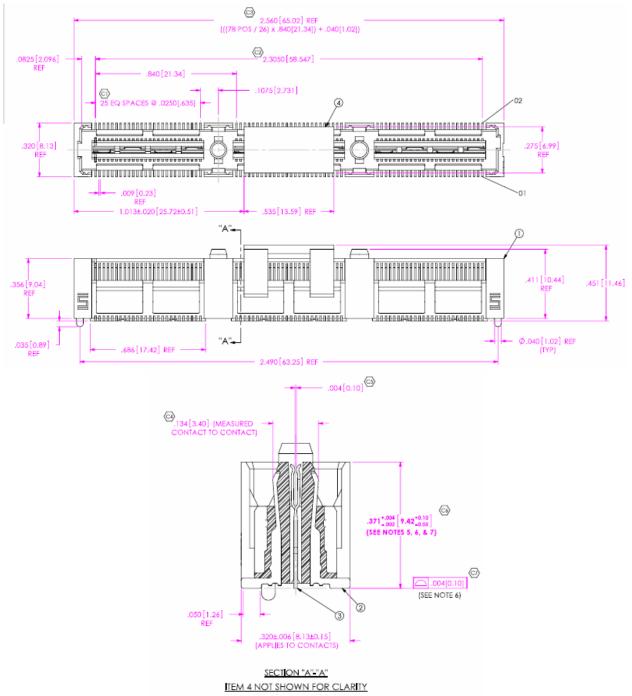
ASP-129646-03 or equivalent Mechanical Drawings (Reference Only)
